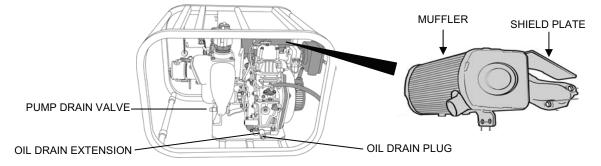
Diesel Engine Pump Drain, Oil Drain Extension, and Muffler Shield Plate.
